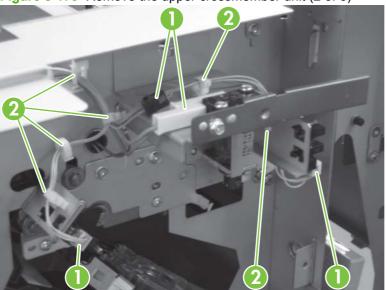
Remove the upper crossmember unit (2 of 5)
